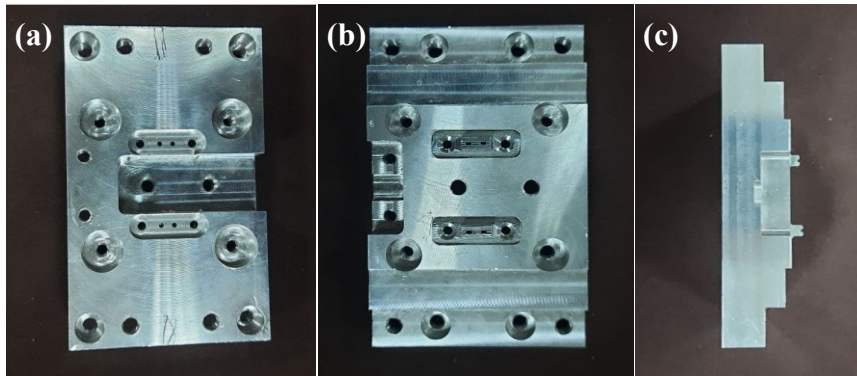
Middle radial car: (a) front view, (b) back view and (c) side view
